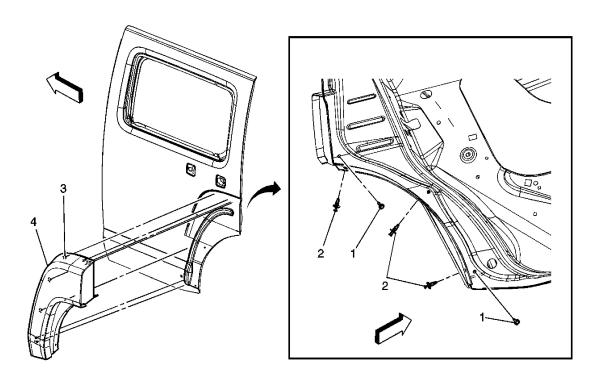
Wheel Opening Flare Replacement - Rear (Door Side) Courtesy of GENERAL MOTORS CORP.
